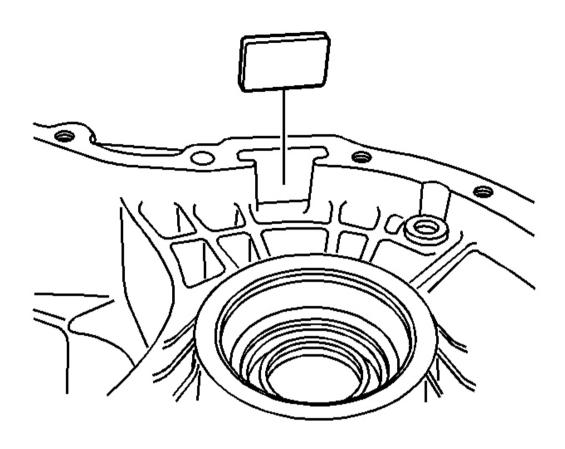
View Of Transaxle Magnet Courtesy of GENERAL MOTORS CORP.
